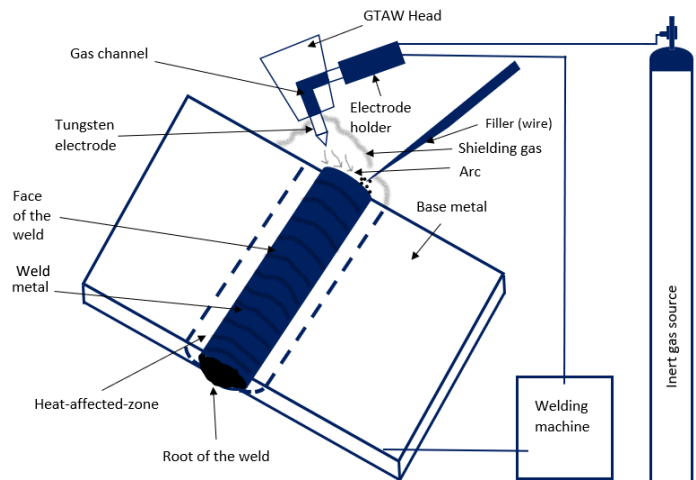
Schematic illustration of the HAZ produced by gas tungsten arc welding, /17-18/.
